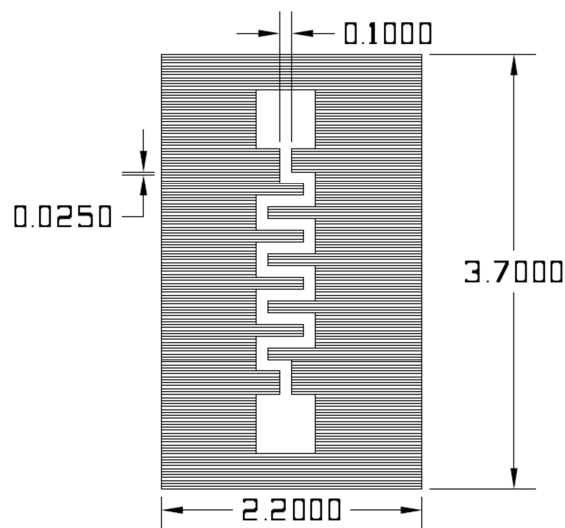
Machining drawing of a microwave inductor to be produced by laser etching method.
